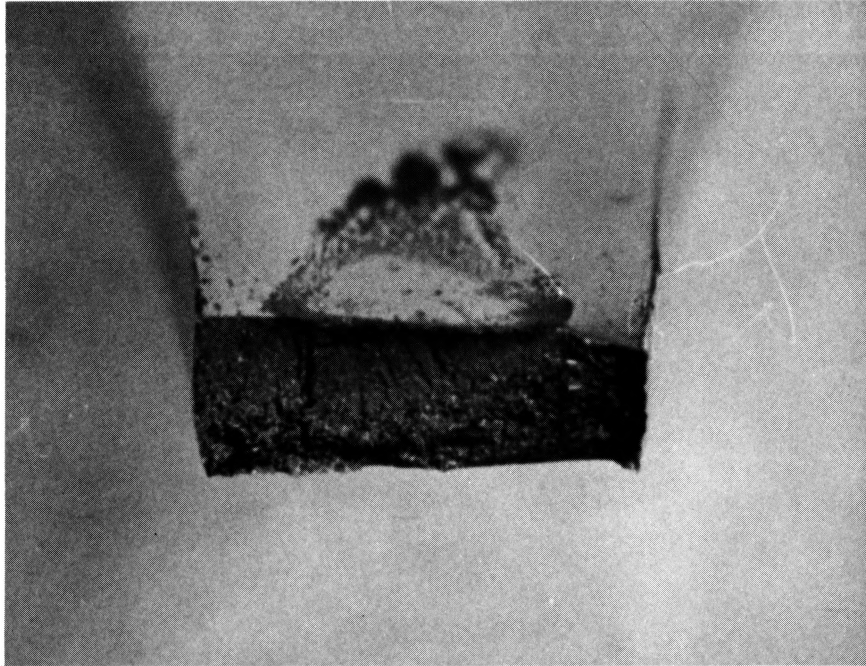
Fracture surface of as received fretting fatigue specimen 2-71 (733,590 cycles).
